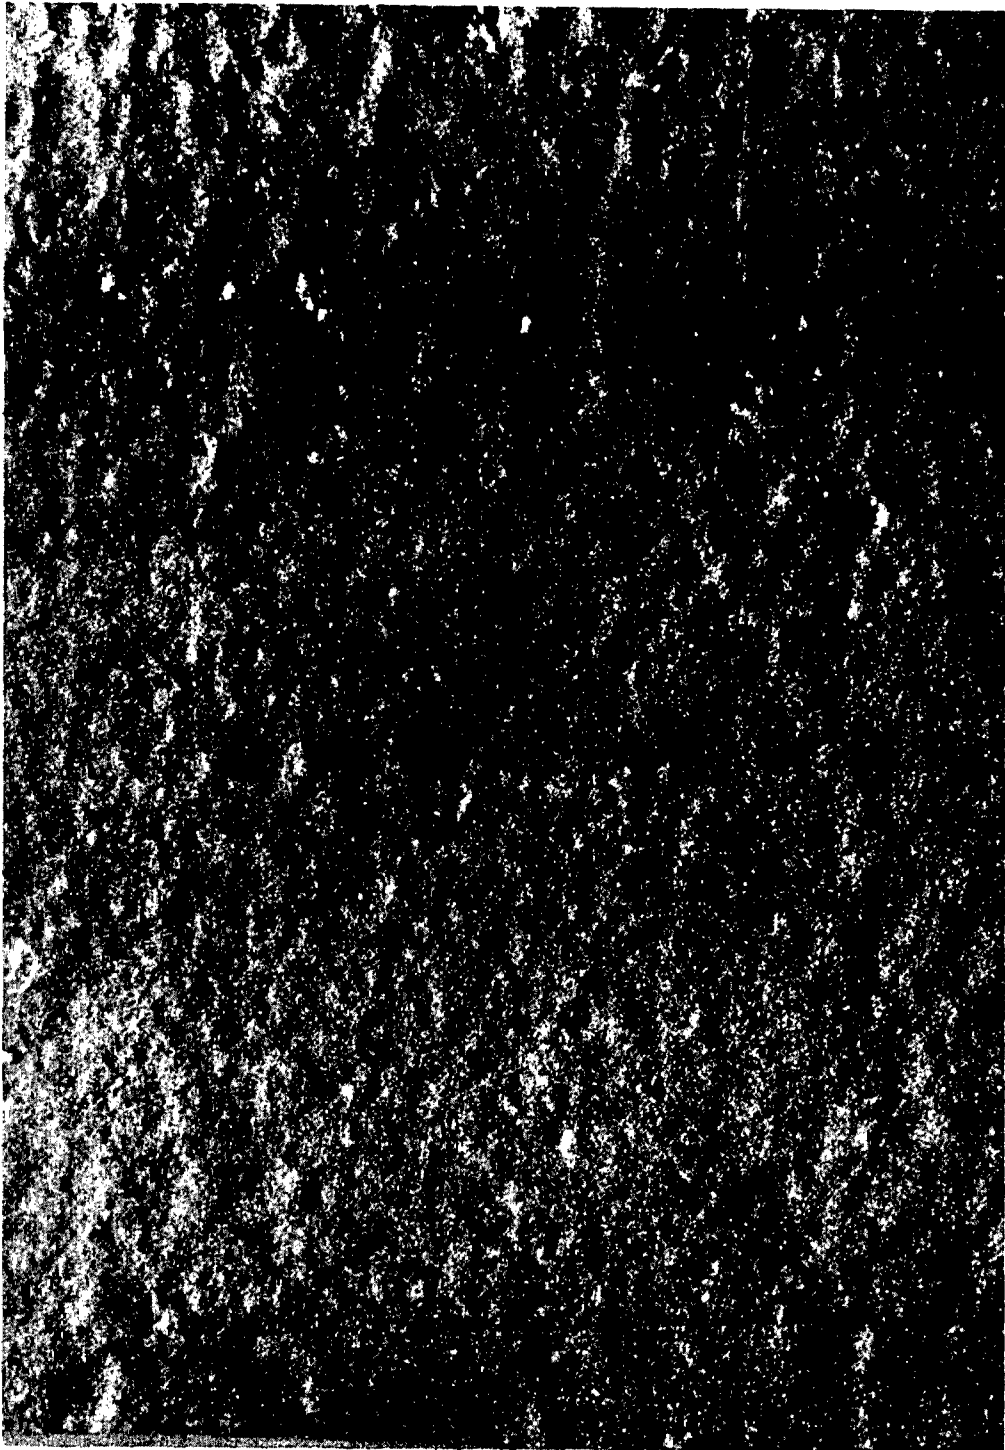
Representative Surface Condition of Rectangular Blade Casting.
